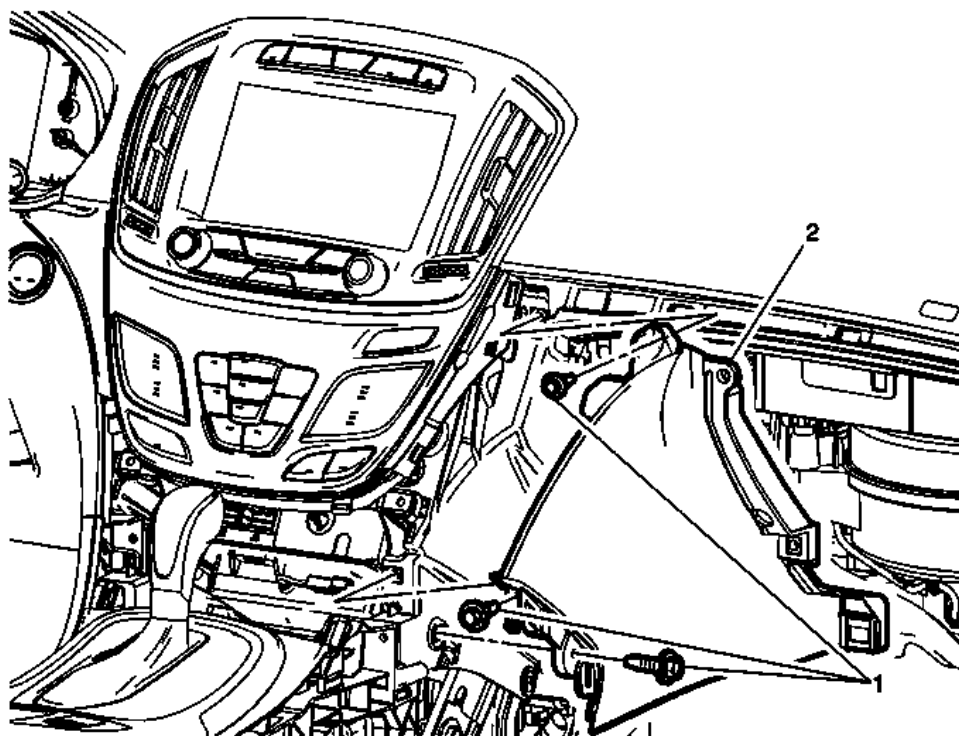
Instrument Panel Lower Extension Side Trim Panel
